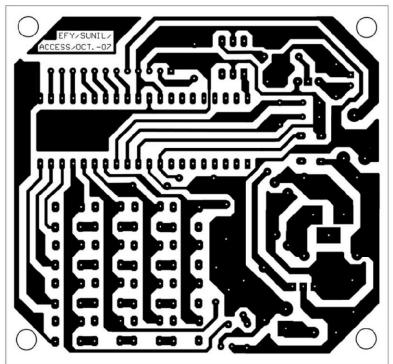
A single-side, actual-size PCB layout for secured room access system
